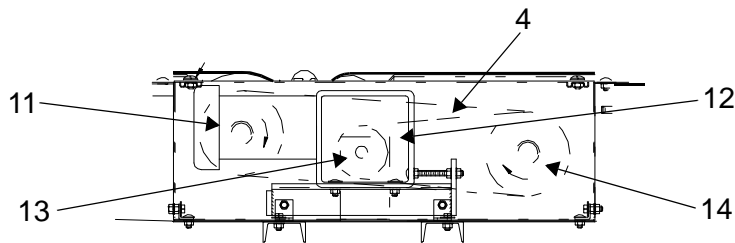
Power Unit - Side Mounted (SM) RH Assembly Shown
